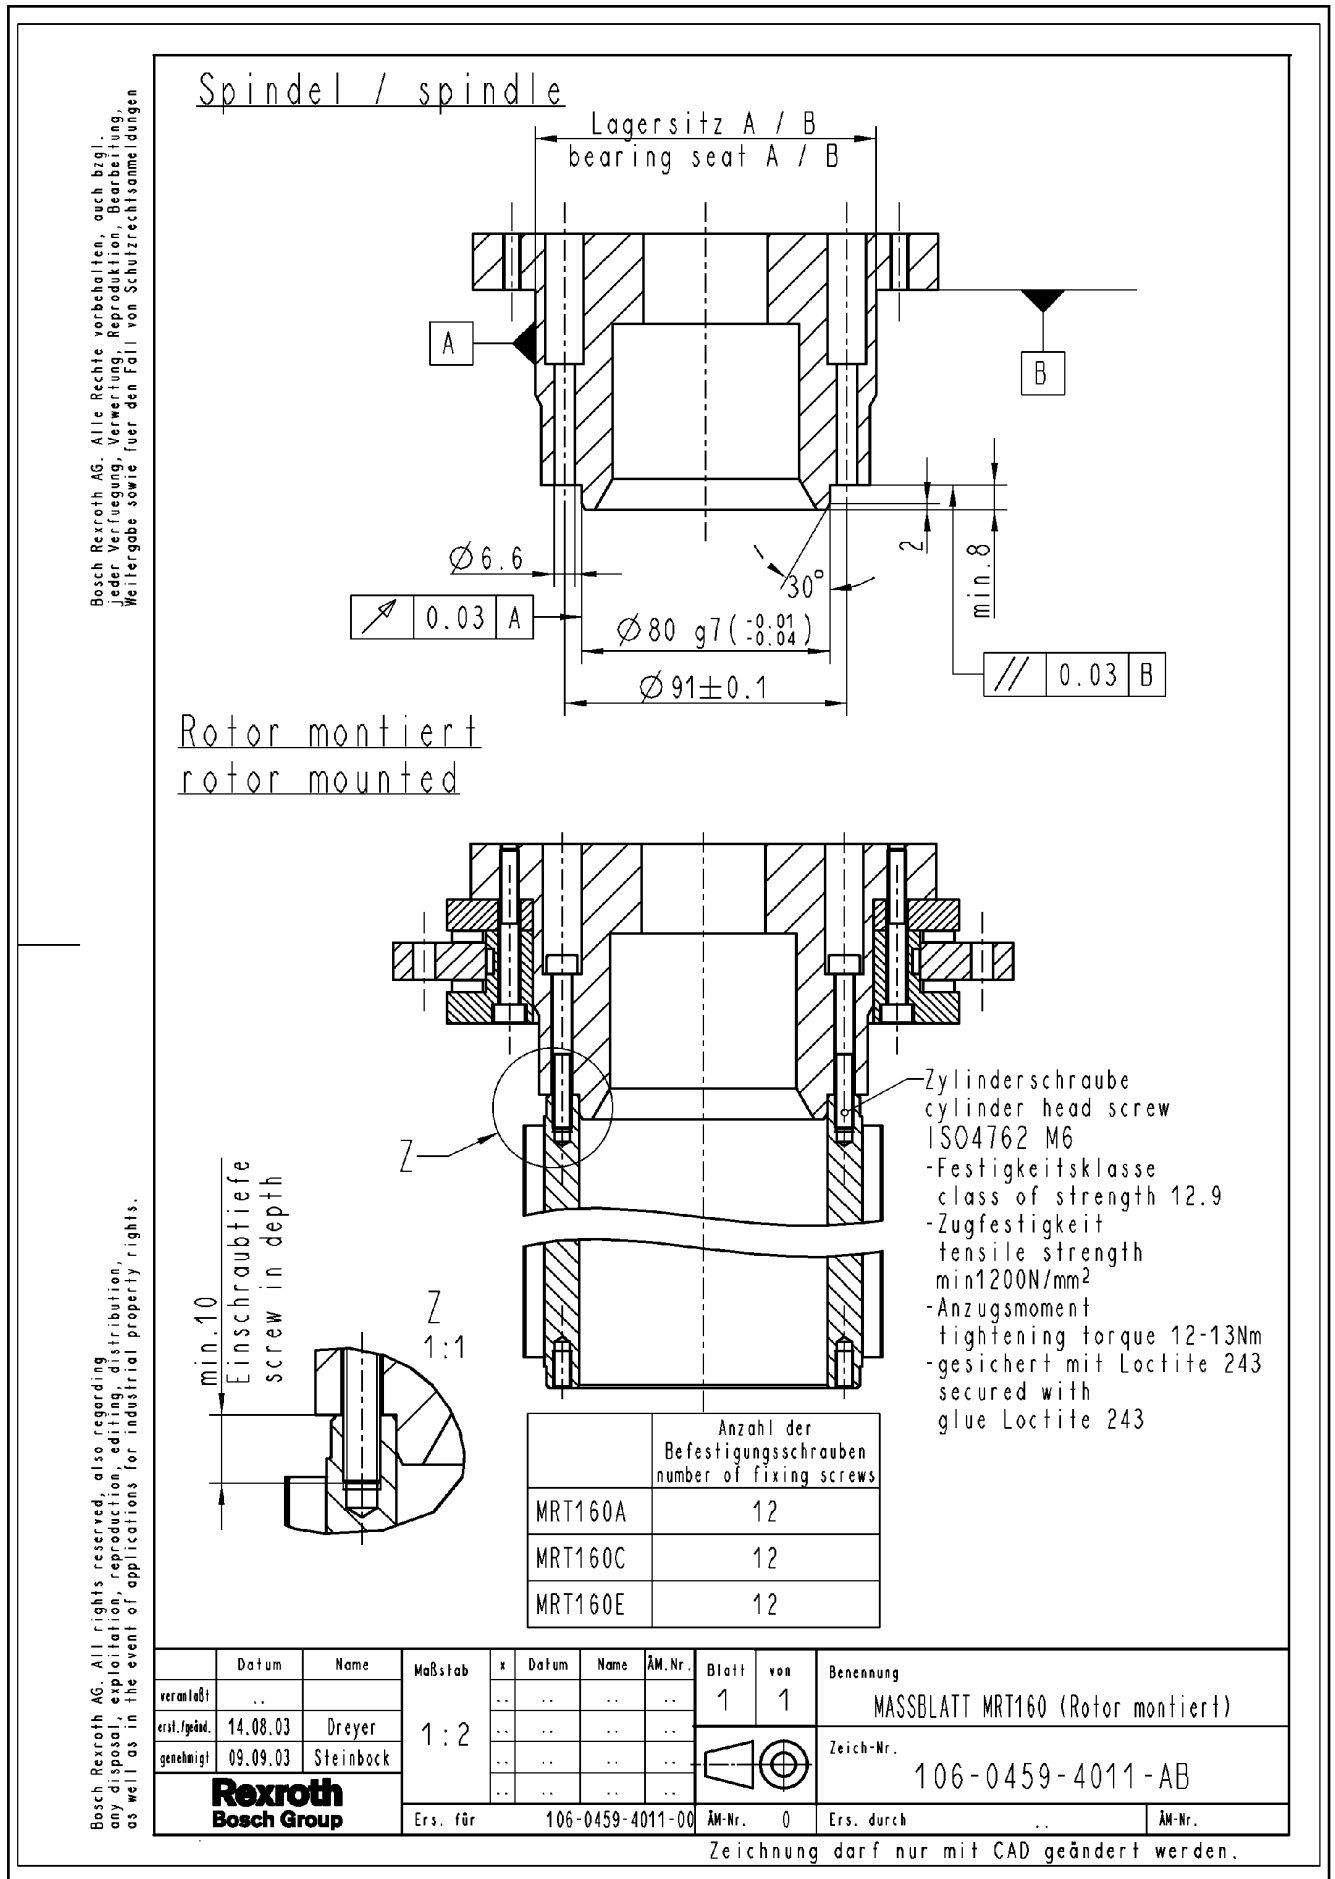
Dimension sheet for rotor MRT160, mounted
